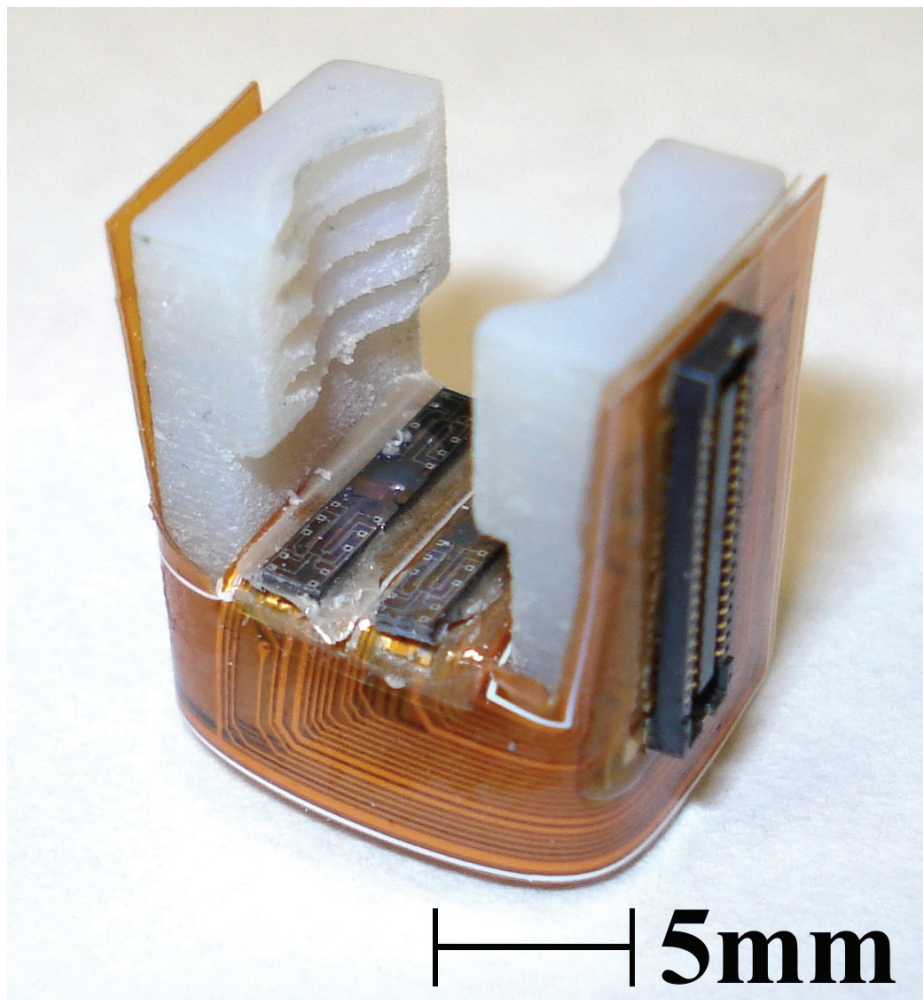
A scoliosis pedicle screw mockup with the sensor strips and FPCB attached. The component on the right of the image is the connector for attaching the wireless module.
